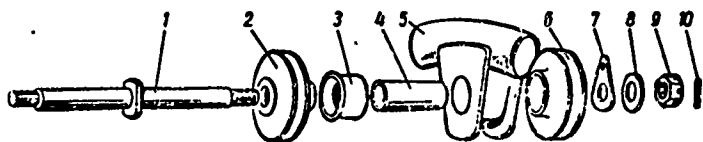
Mounting lug of the engine to the mount: 1 - stud bolt; 2 - shock absorber; 3 - ring; 4 - sleeve; 5 - engine mount lug; 6 - shock absorber; 7 - metallization washer; 8 - washer; 9 - nut; 10 - cotter pin.
